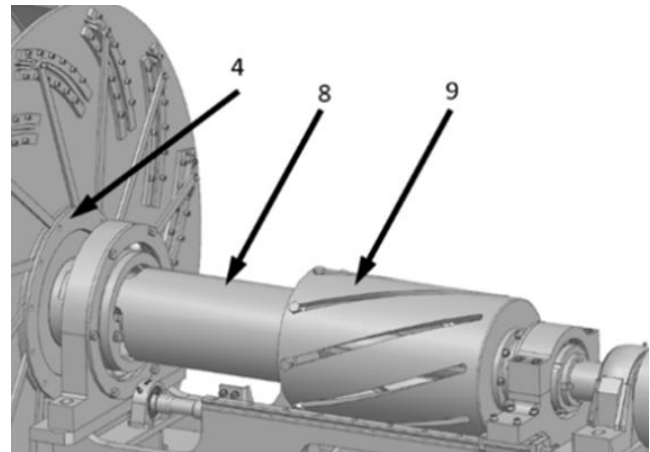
Impeller geometry with tie rods mechanism—parts mounted on the drive shaft
